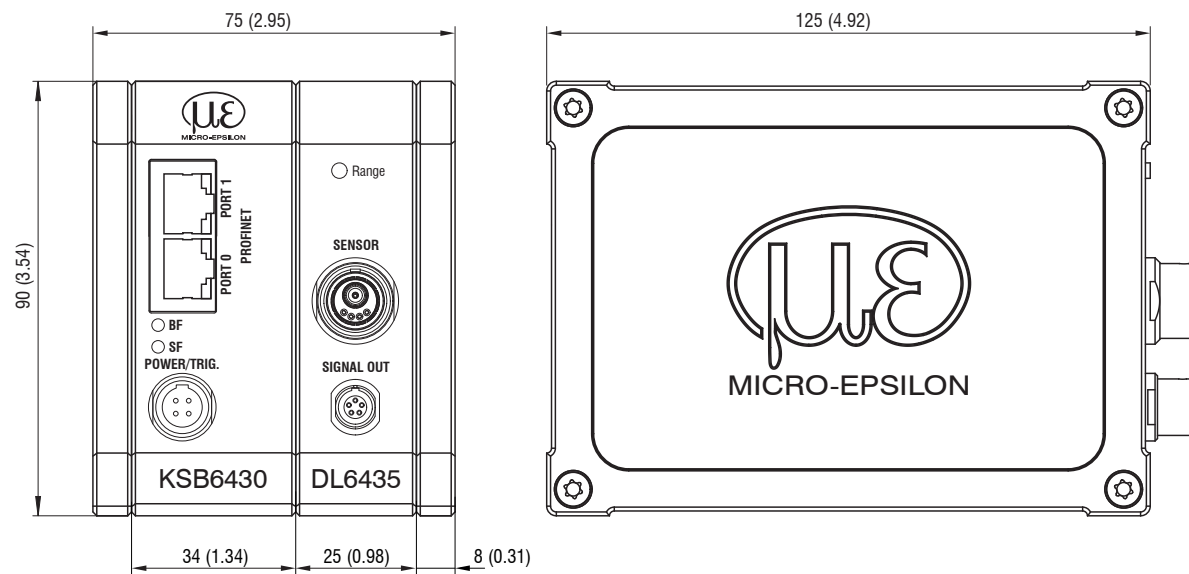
Dimensional drawing of controller with base unit, demodulator and housing cover, dimensions in mm (inches, rounded off)
